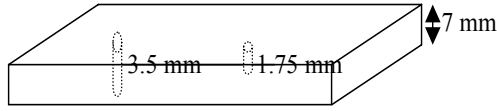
Sketch of the specimen with simulated pitting corrosion like defects.
